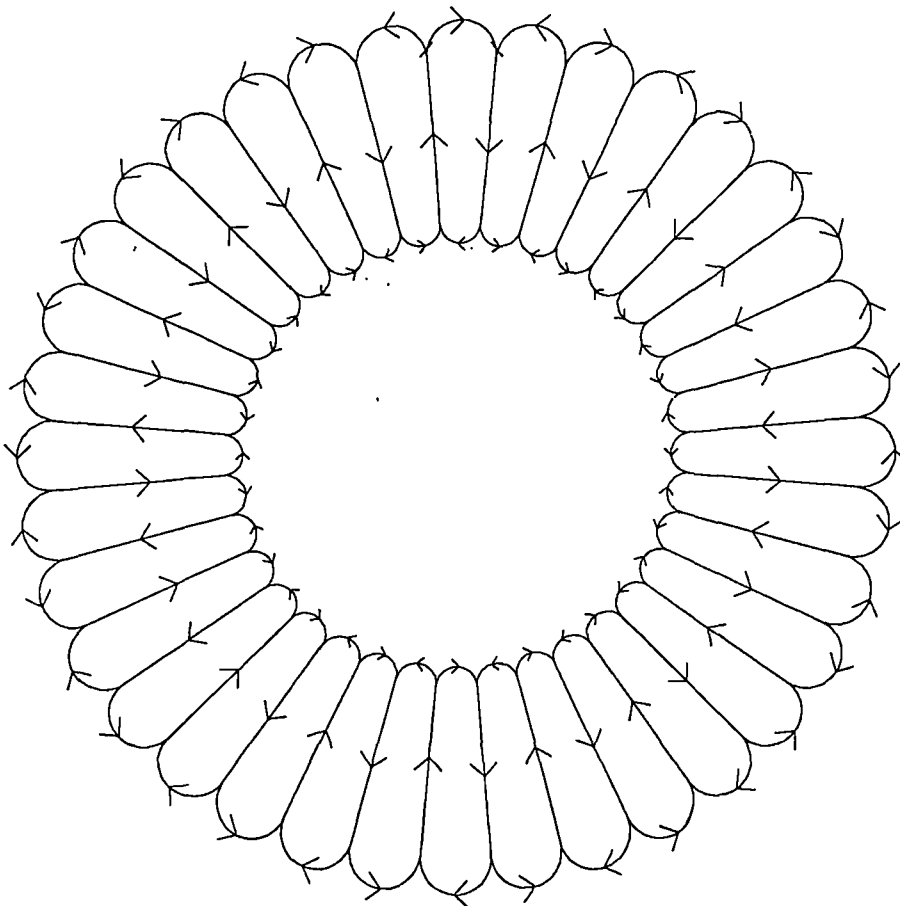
36 pole axial magnetizing fixture with semi-circular end-windings.
